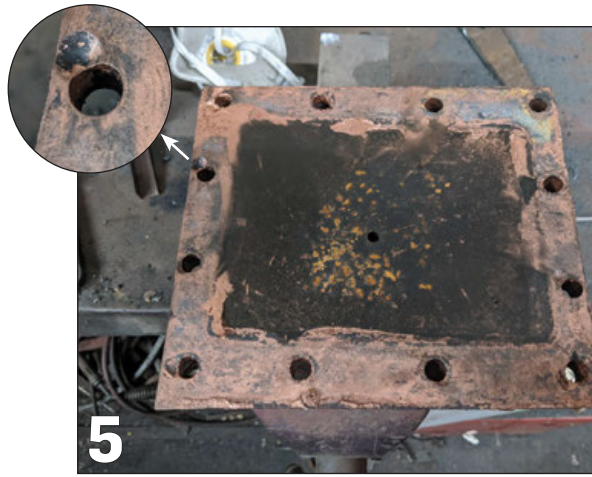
Missed spot drilling on valve chest cover – clearly visible in inset.
